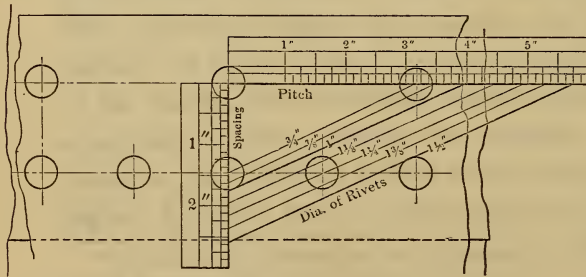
DOUBLE RIVETED DOUBLE BUTT STRAP JOINT.
